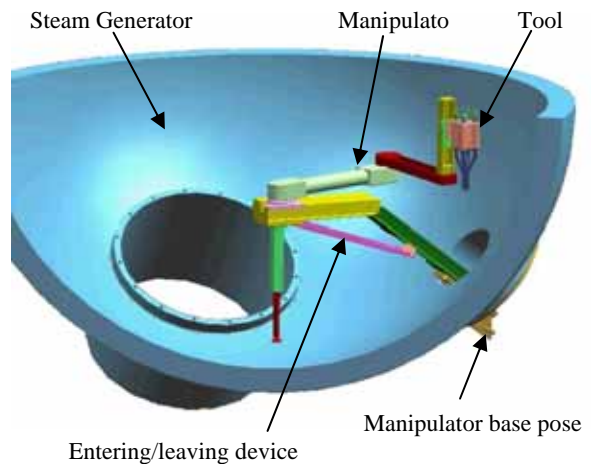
Steam generator heat exchanging tube inspection/maintenance robot.
